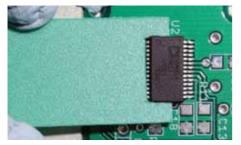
The chip from Photo 5 in place ready to be soldered.
